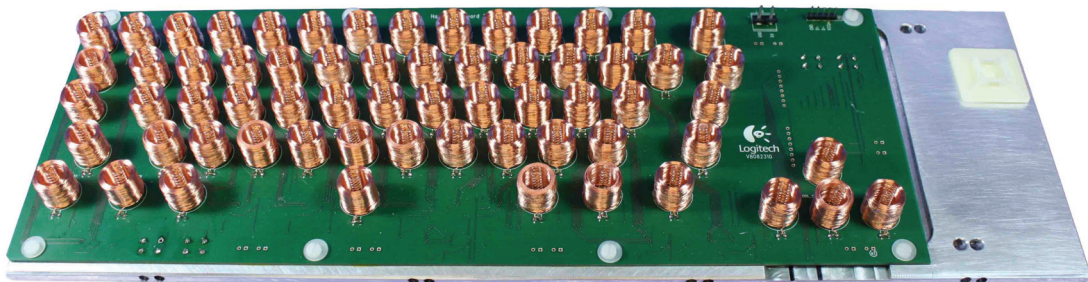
Assembled bottom case of the Haptic Keyboard
